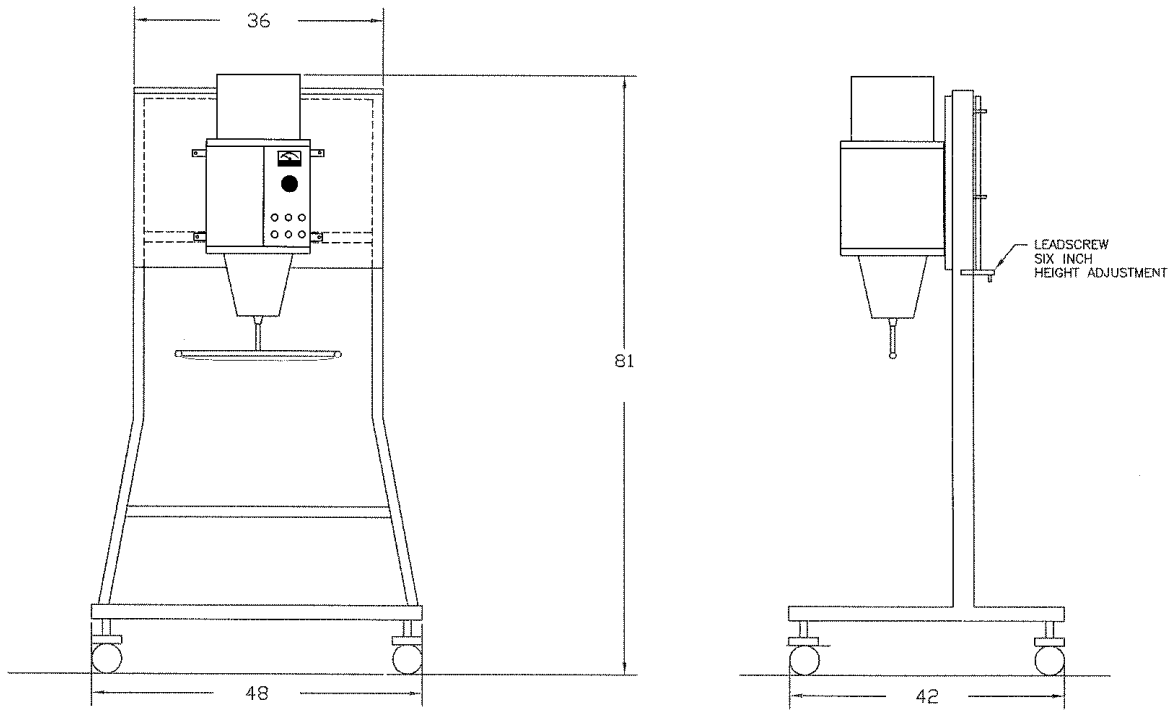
Dimensional Drawing Model BD-80C w/Stand
